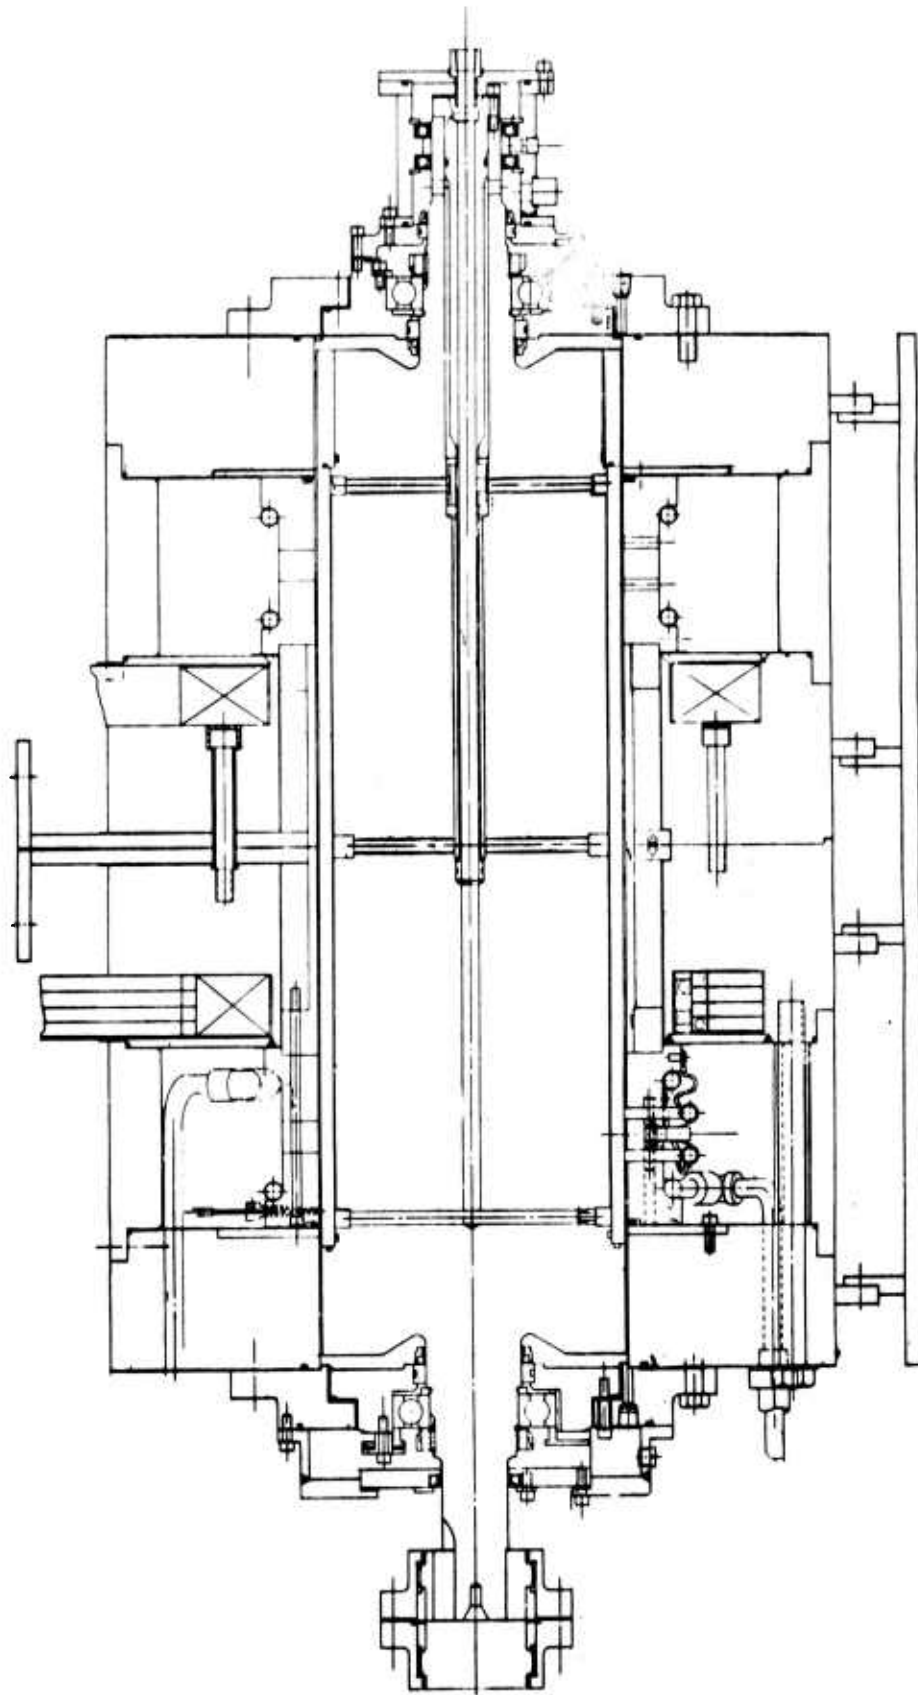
Machine-Environment Brush Tester (MEB)
